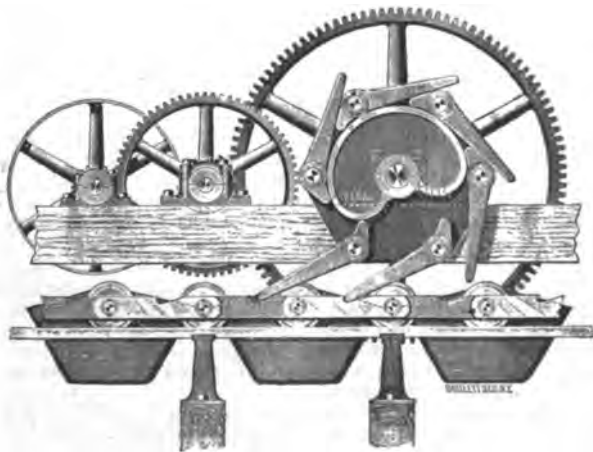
OPERATING MECHANISM, HUNT COAL CONVEYER.
